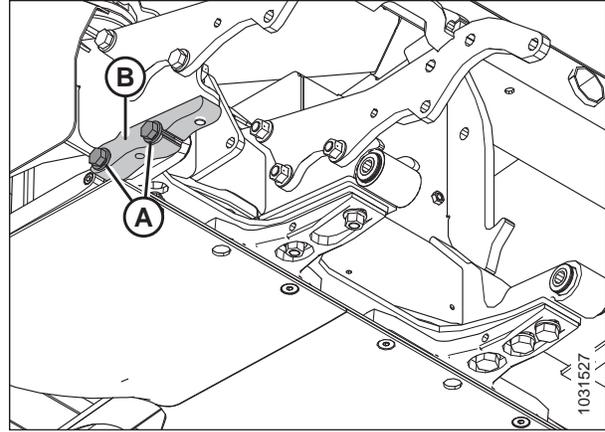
Cutterbar Bolts – Bottom View, Left End Shown, Right End is Opposite
